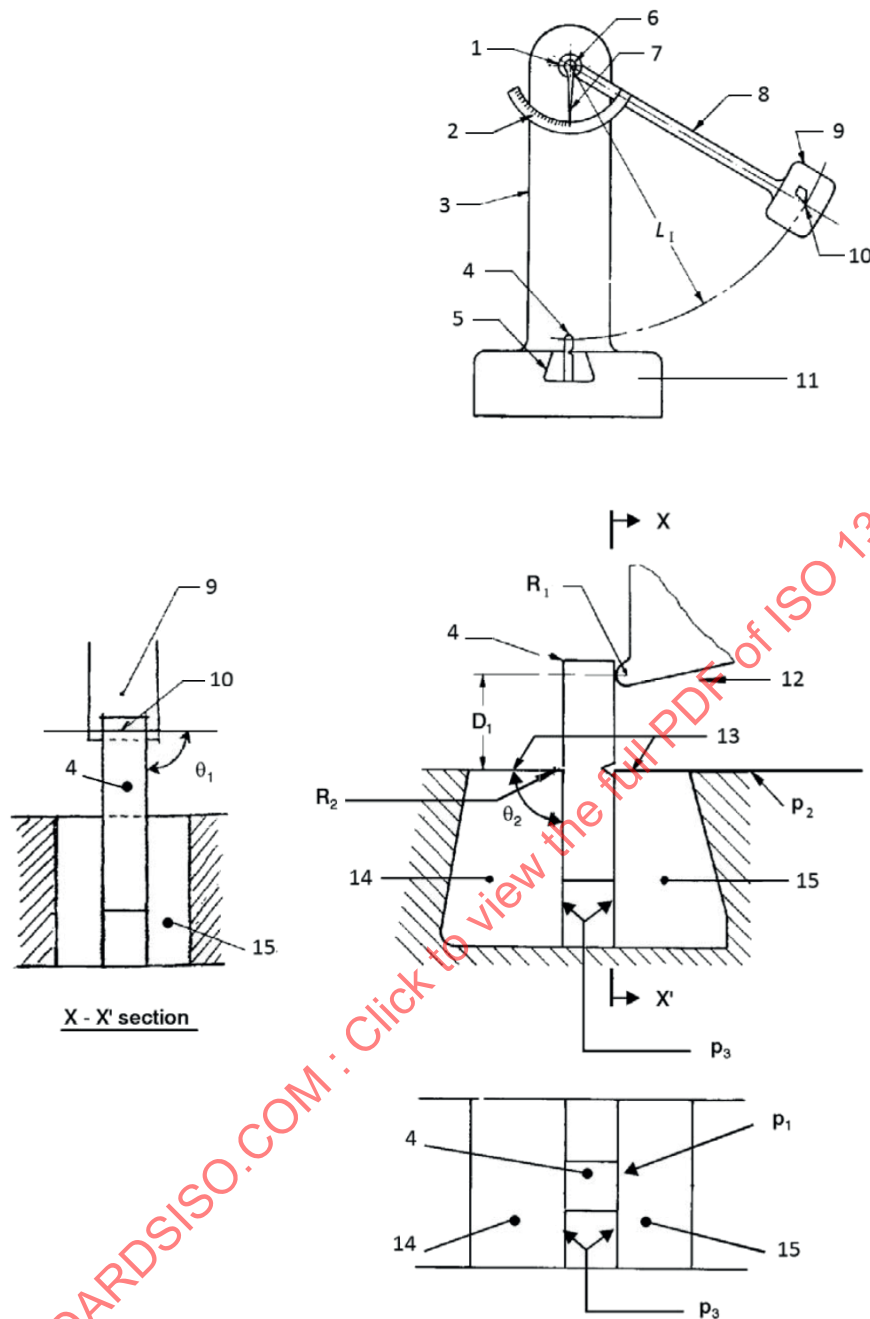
Example of Charpy test machine (for dimensions, see [Table A.1](#))
